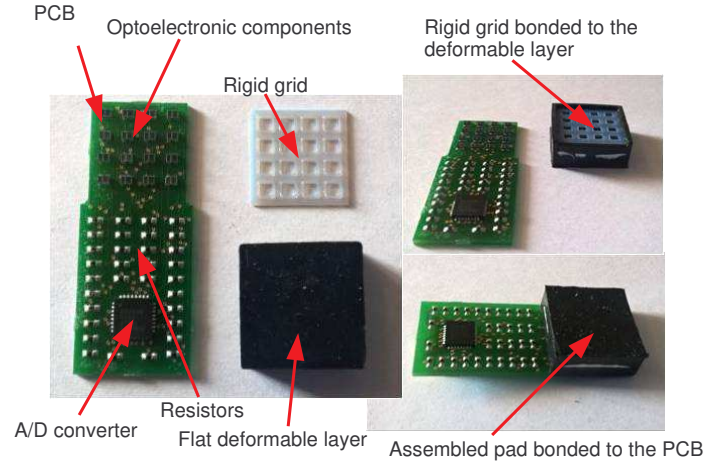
Some pictures of the tactile sensor during the assembly.
